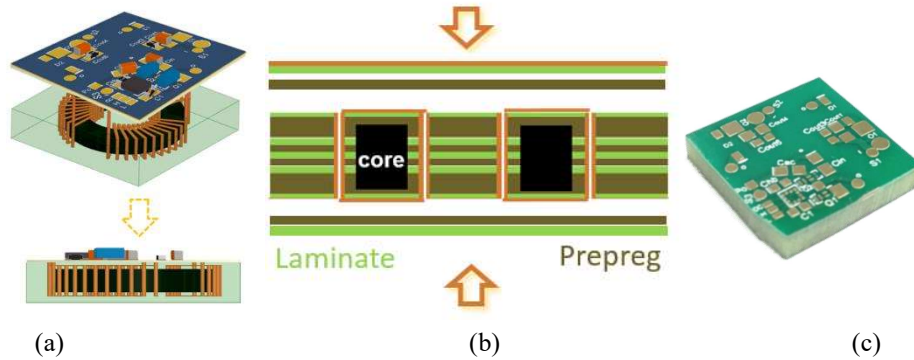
(a) Converter assembly with the transformer substrate; (b) PCB lamination to connect the transformer and the circuit; (c) Converter after the assembly
